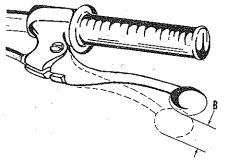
The clutch hand lever should have 1/16-in. play at B.
